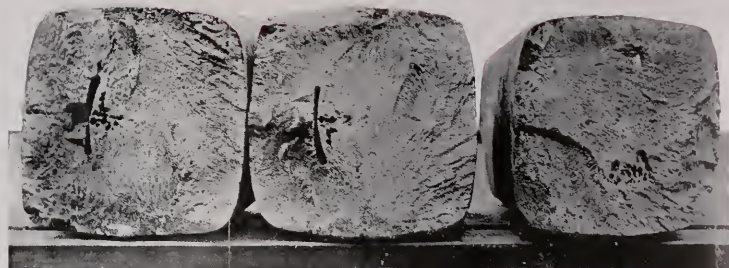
Ingot placed on its side before interior steel had solidified.
